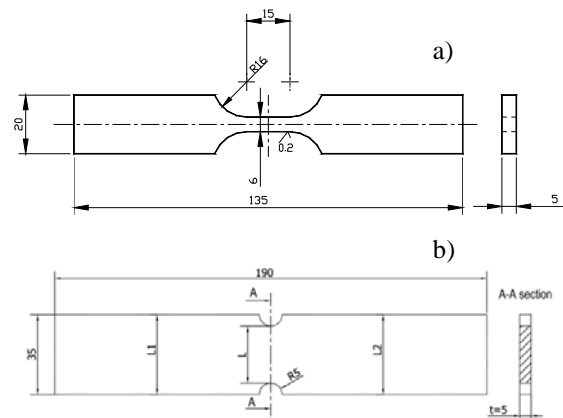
Geometry of the specimens: a) smooth; b) double notched (dimensions in mm).
